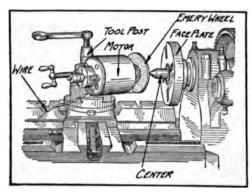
Electrically Operated Grinding Attachment for Lathe Toc
